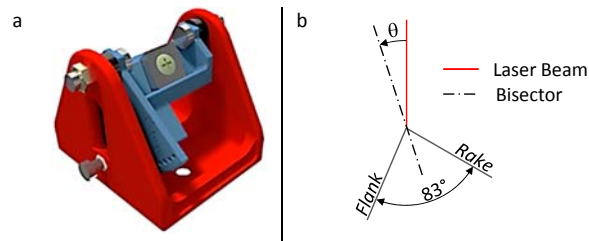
(a) Fixture; (b) Angular reference scheme.
